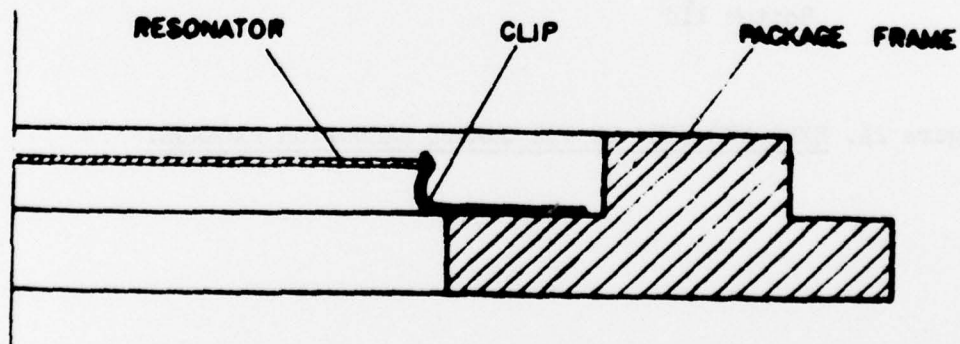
CROSS SECTION OF PACKAGE FRAME SHOWING RESONATOR AND MOUNTING CLIP CONFIGURATION
